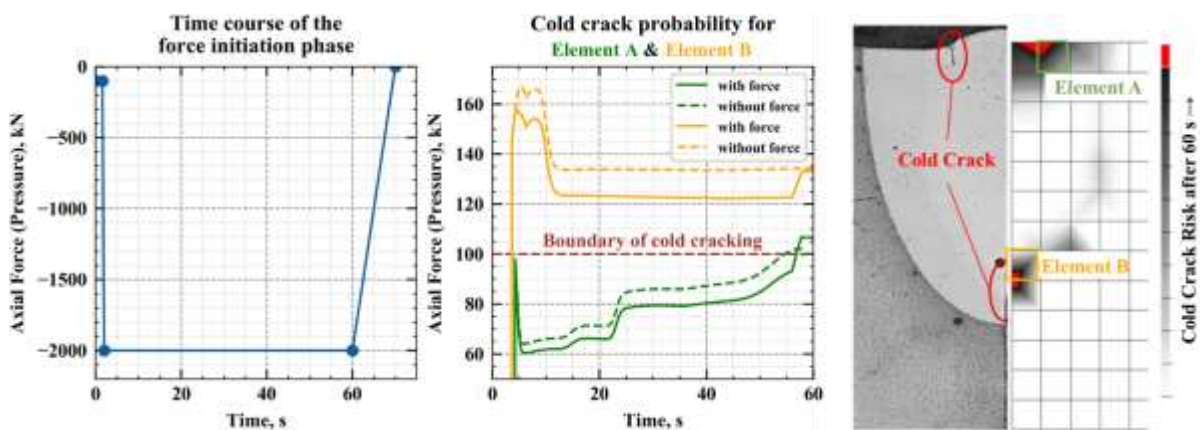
Axial force after welding to reduce the tendency to cold cracking
